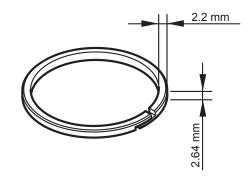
Smallest accepted dimensions of the TTX40 damper piston band.
